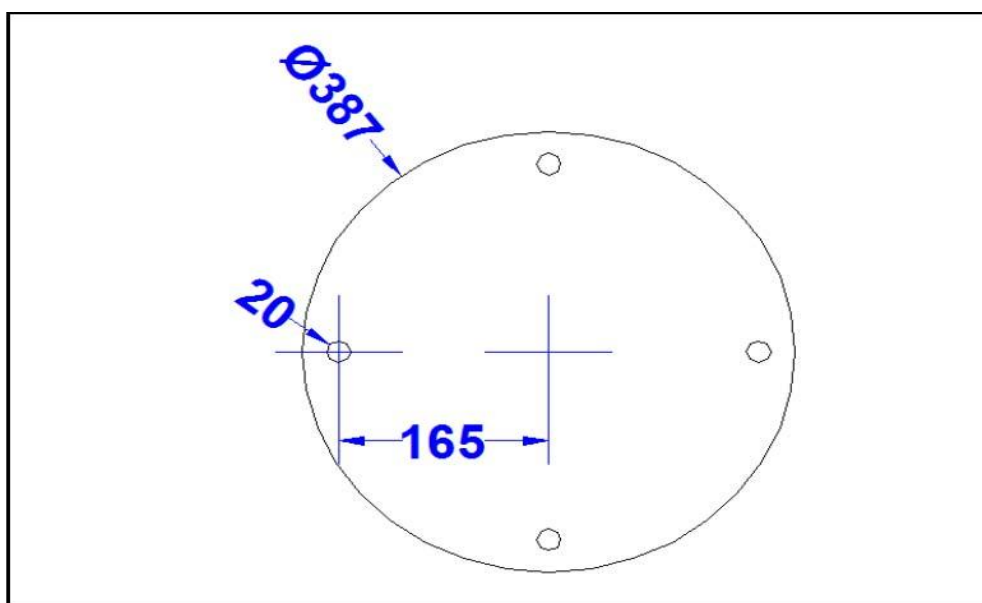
Temporary patch-plate - Horizontal Flange Connection
